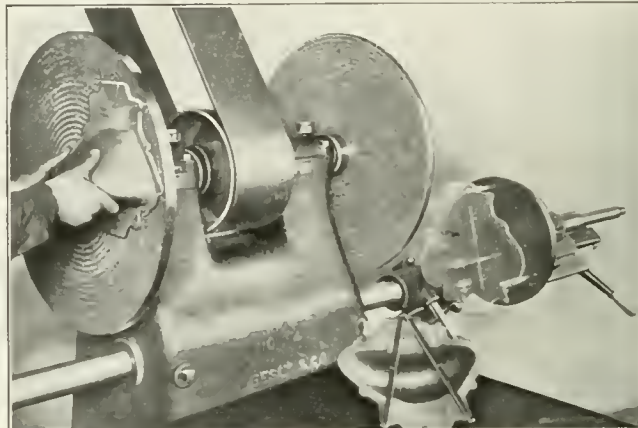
Grinding Cast-Iron Gear-case Covers; Rate, 40 to 50 Pieces per Hour from the Rough
